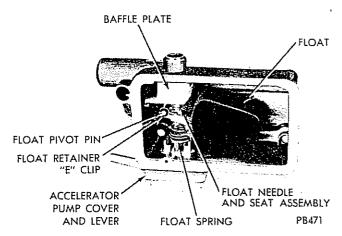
FUEL BOWL ASSEMBLY INTERNAL ADJUSTED NEEDLE AND SEAT
